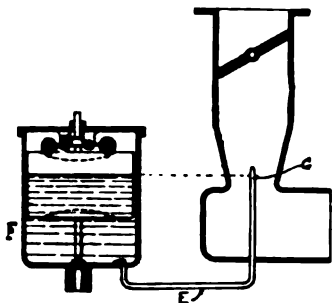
A simple type of carburetor. Jet (G), fed from float chamber.
